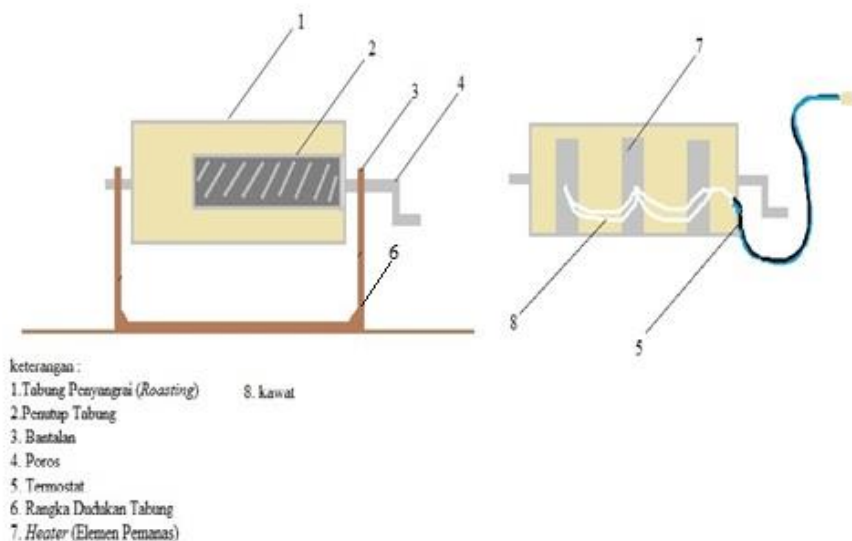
Design and Drawings of the Coffee Bean Roaster Design
